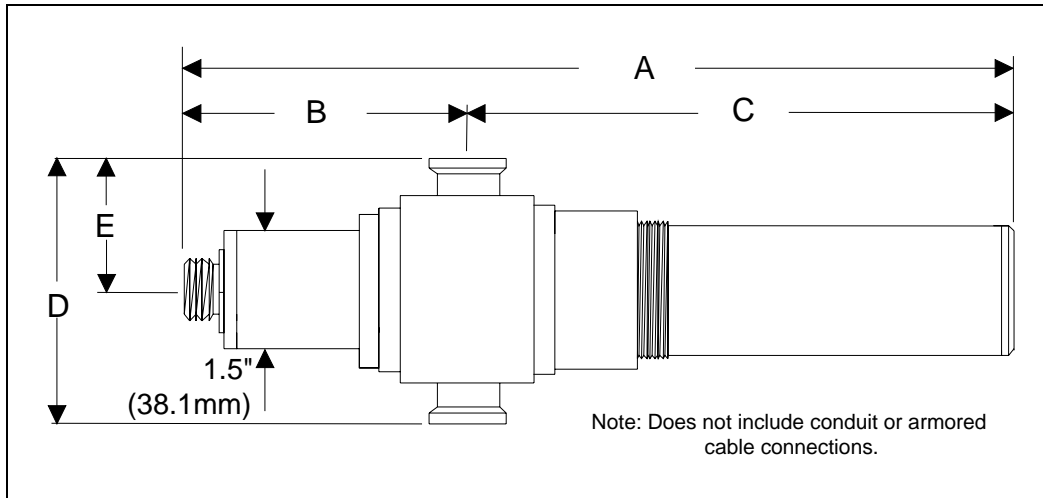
Model AF44 EXP-1 Inline Sensor Dimensions
